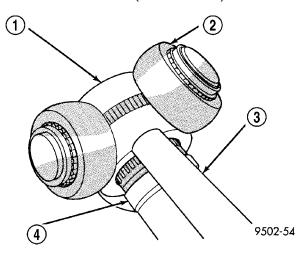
Spider Assembly Removal from Interconnecting Shaft
